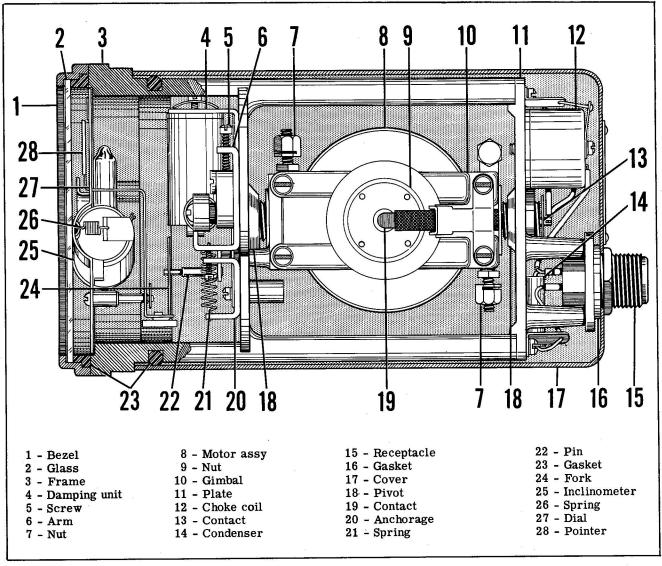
Bank and Turn Indicator Assembly, Model B4
